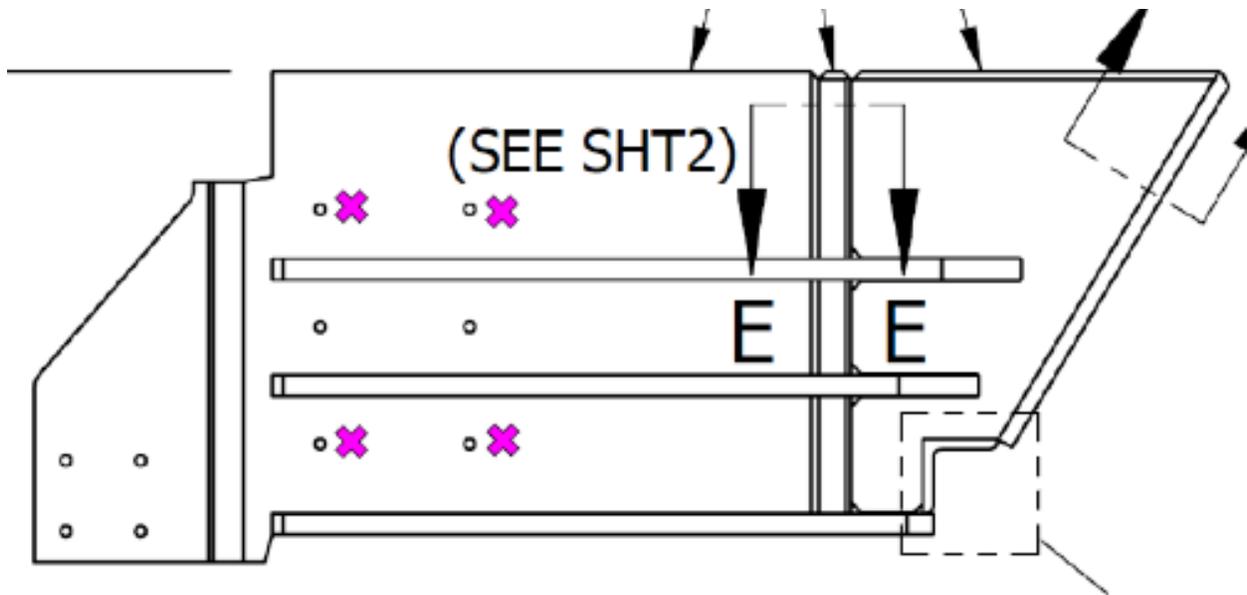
Strain Gage Locations on CEM Locomotive Draft Pocket
